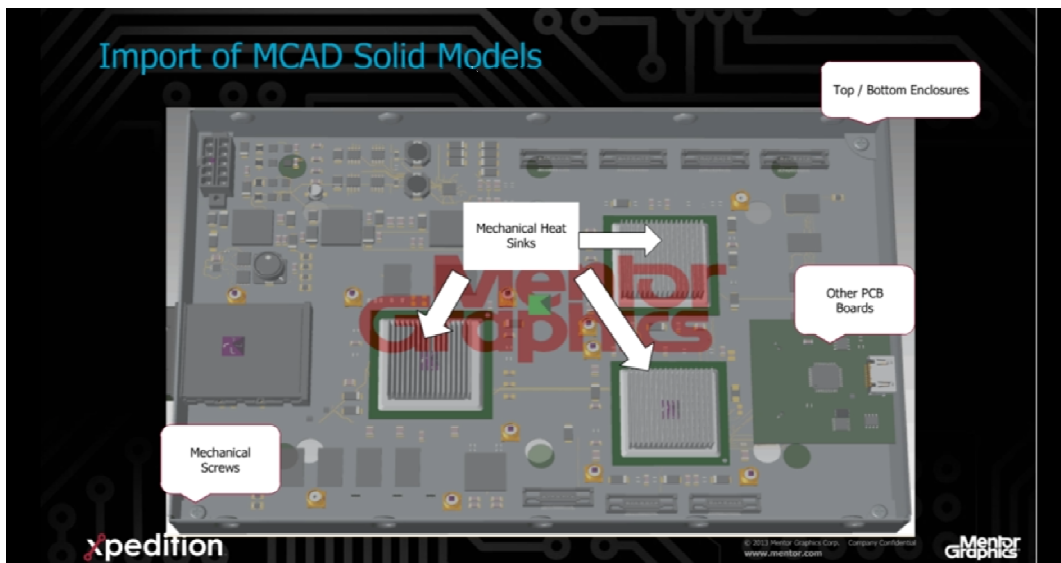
Mentor Graphics' Xpedition layout tool (16)
